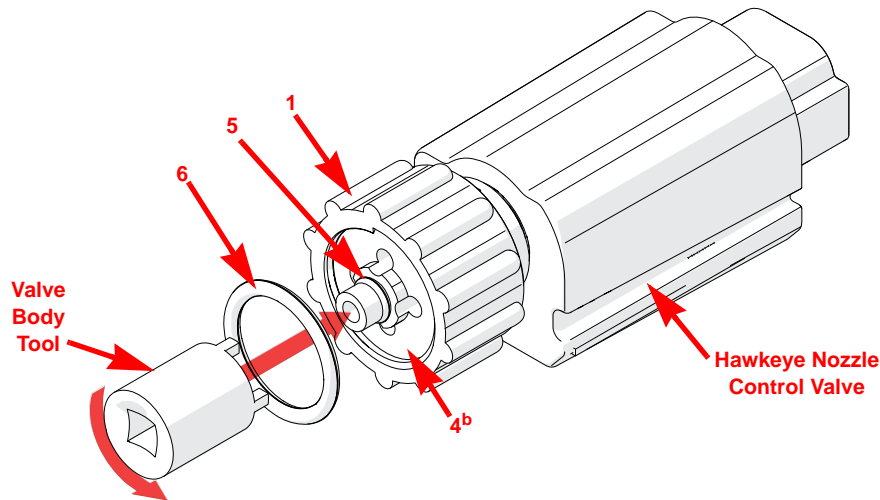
Seal Replacement Kits and Valve Body Assembly
